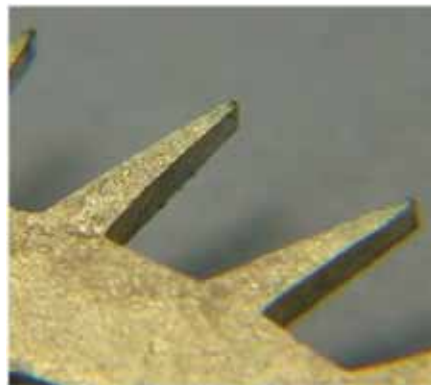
Once all of the drawing, planishing, indexing, tipping, buffing, and filing is done, the damaged teeth should look much better.
